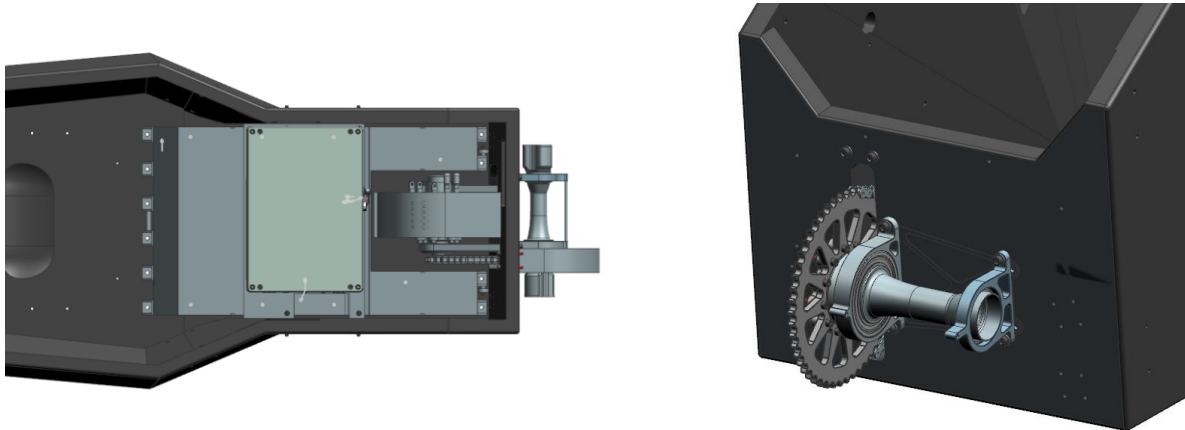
Overhead view (left) and rear isometric view (right) of electric powertrain packaging.
